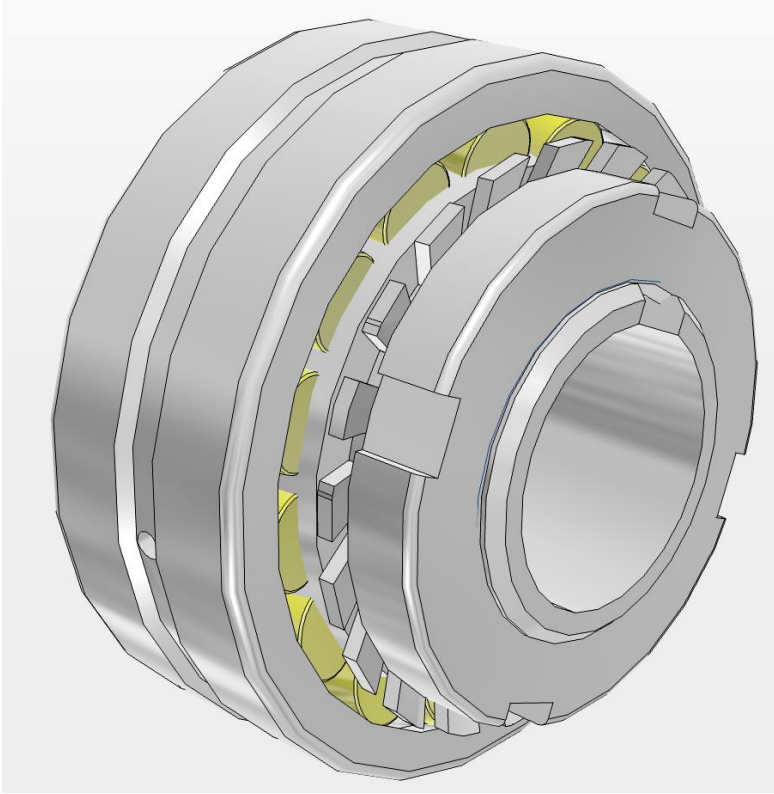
22205 EK bearing + H 305 adapter sleeve
